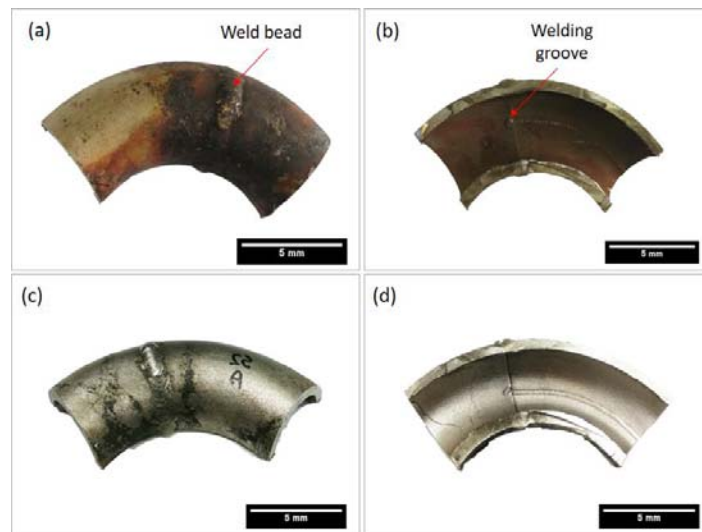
Camera photographs on (a) shell side, (b) tube side of as-received, and (c) shell side and (d) tube side images of as-cleaned of u-bend header tube.
